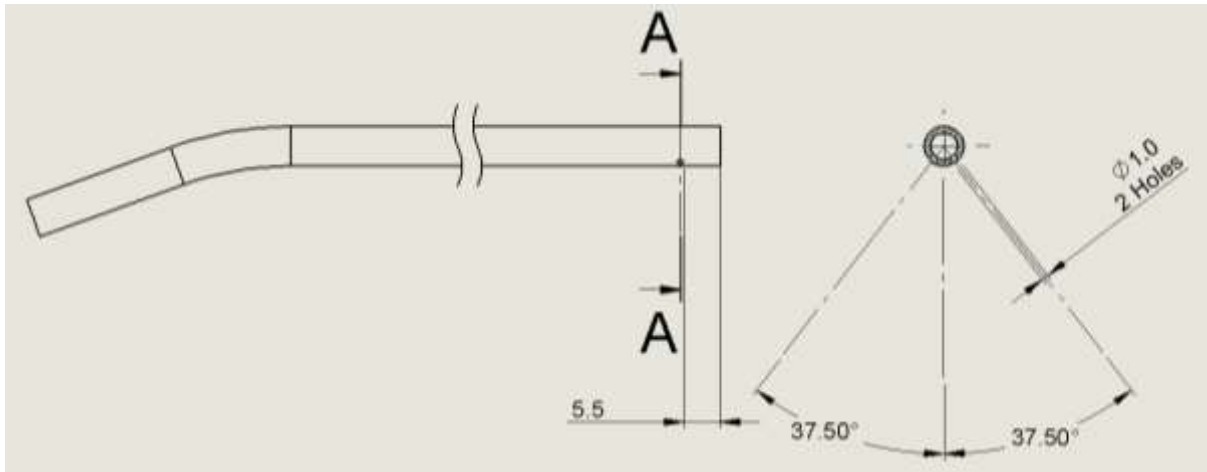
Section and broken view of drawing showing static port locations (endcaps not shown)
